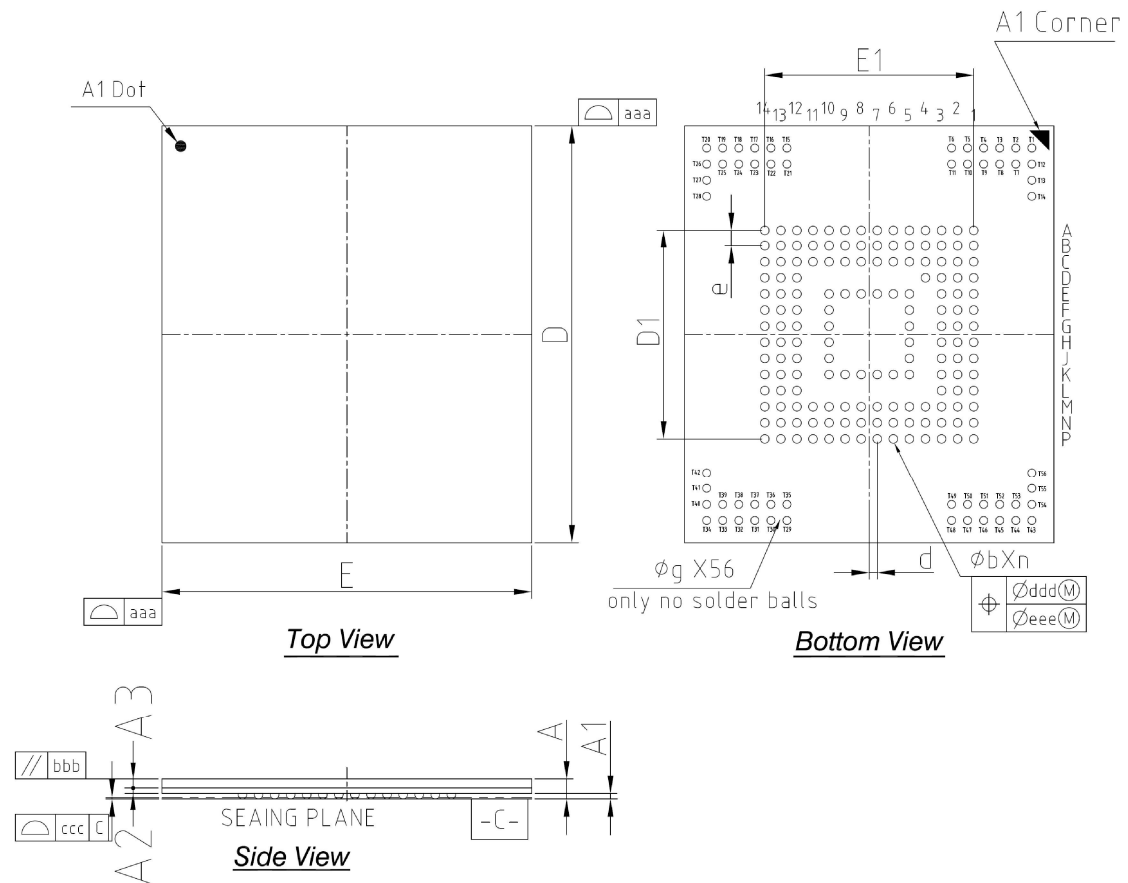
mx13.0mmx1.0mm.max Package Dimension
